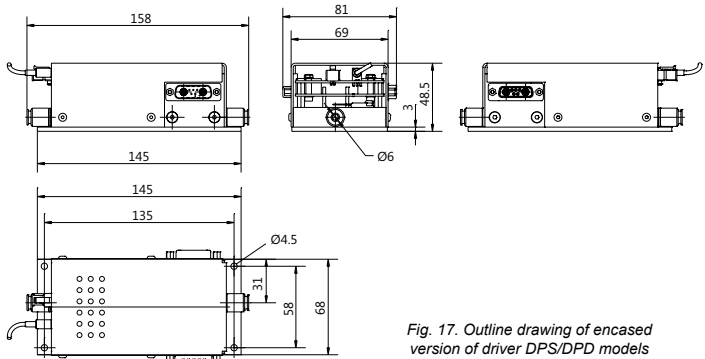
Outline drawing of encased version of driver DPS/DPD models
